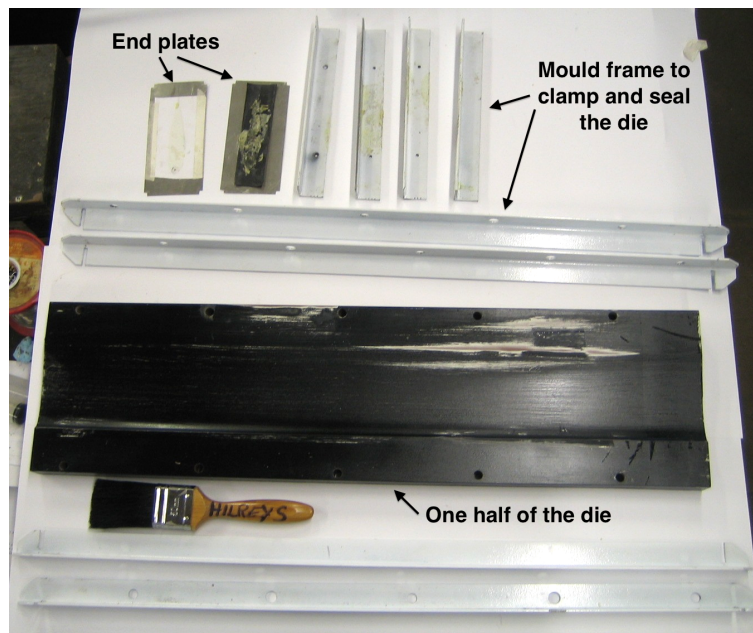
Disassembled mould showing the frame and one half of the die.
